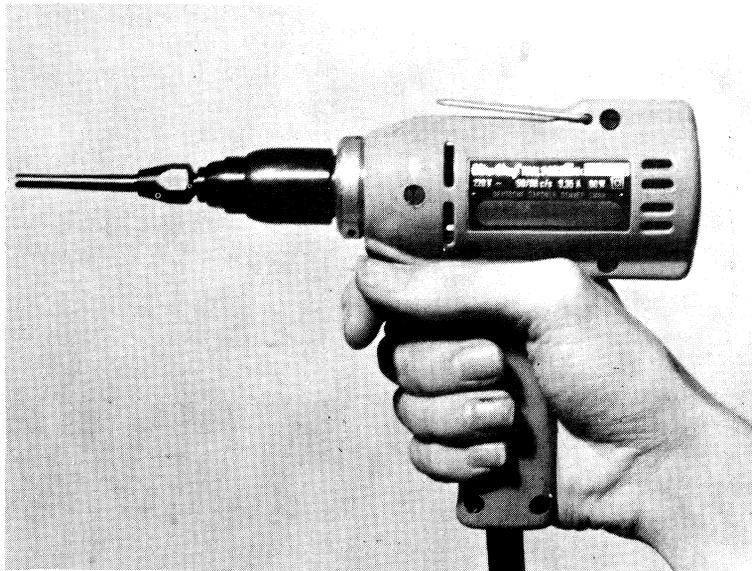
A typical electric-motor driven wire wrapping tool.
